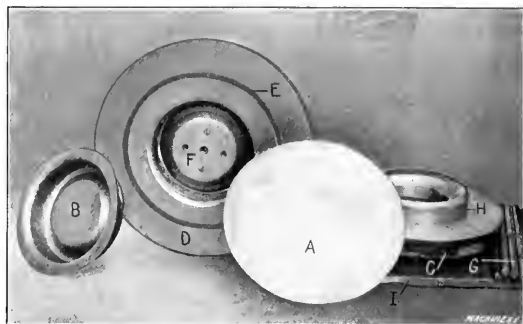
Combination Blanking and Forming Dies for making an Automobile Clutch Cone
